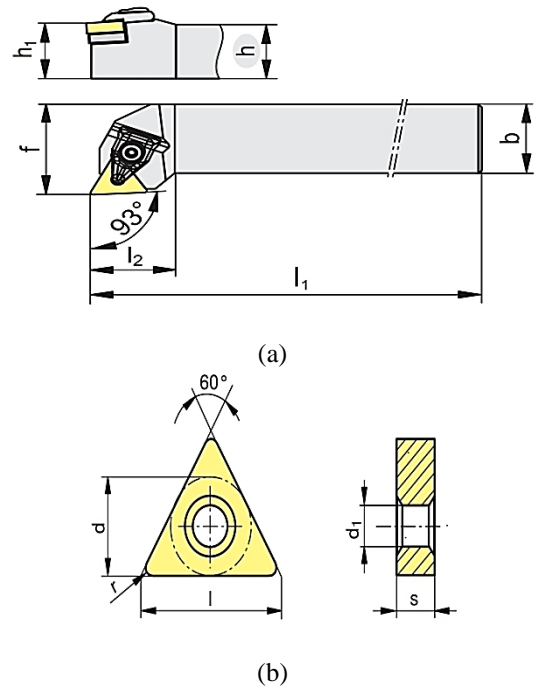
(a) Tool holder geometry, (b) Cutting insert geometry
